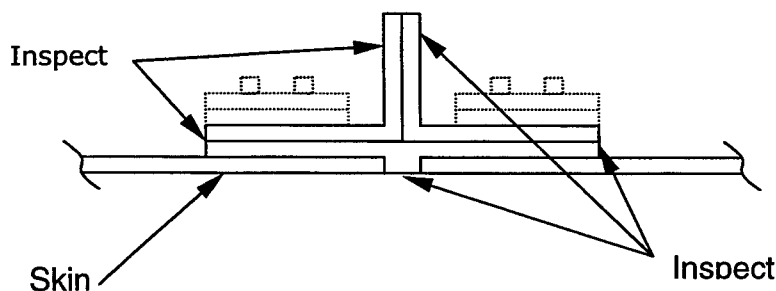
INSPECTION LOCATIONS FOR MAIN SPAR LOWER CAP
